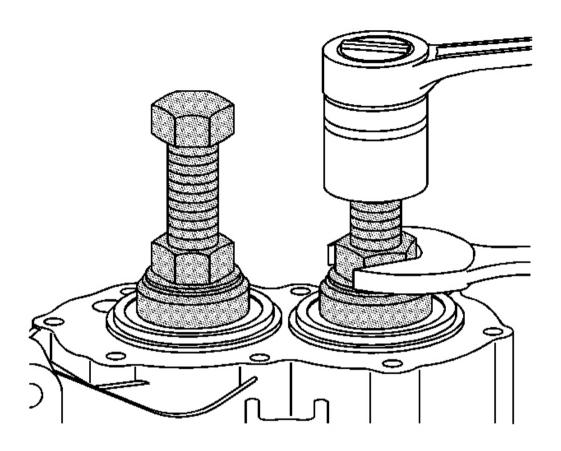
Installing Transaxle Case Using The J 44376 Courtesy of GENERAL MOTORS CORP.
